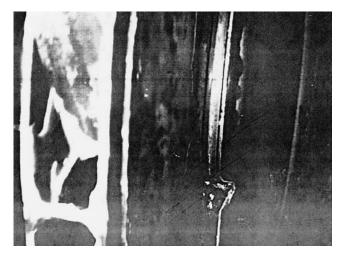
Reformer Recycle Compressor Closeup of Impeller Fouling.
